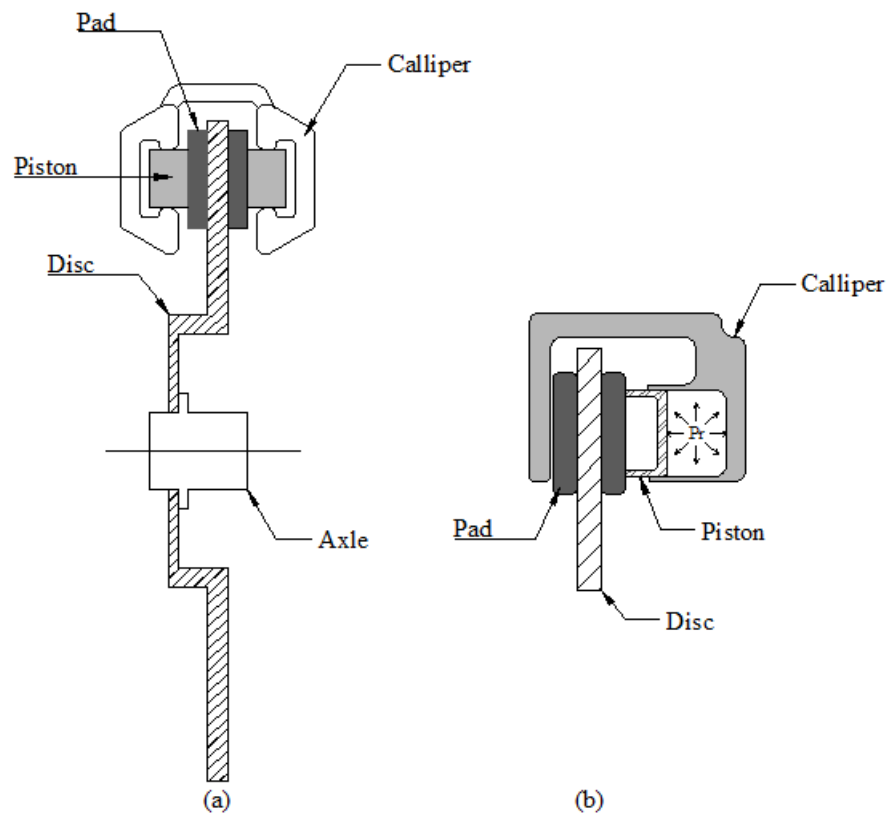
Schematic of disc brakes (a) fixed calliper (b) floating calliper
